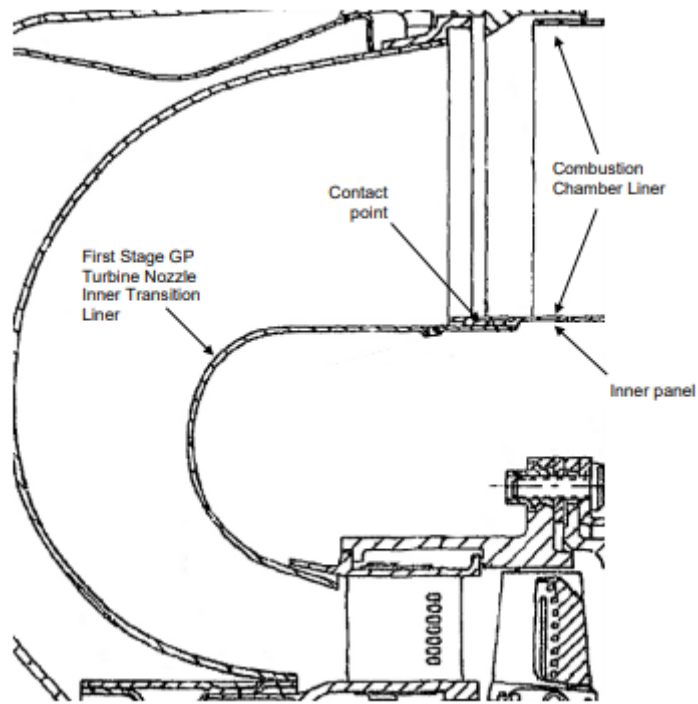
The first stage gas producer turbine nozzle assembly.
